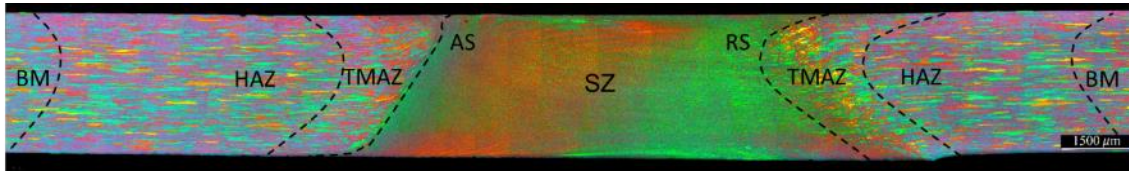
Macrograph of SSuBT-FSW in AA2060 showing the indications of the weld zones and BM.
